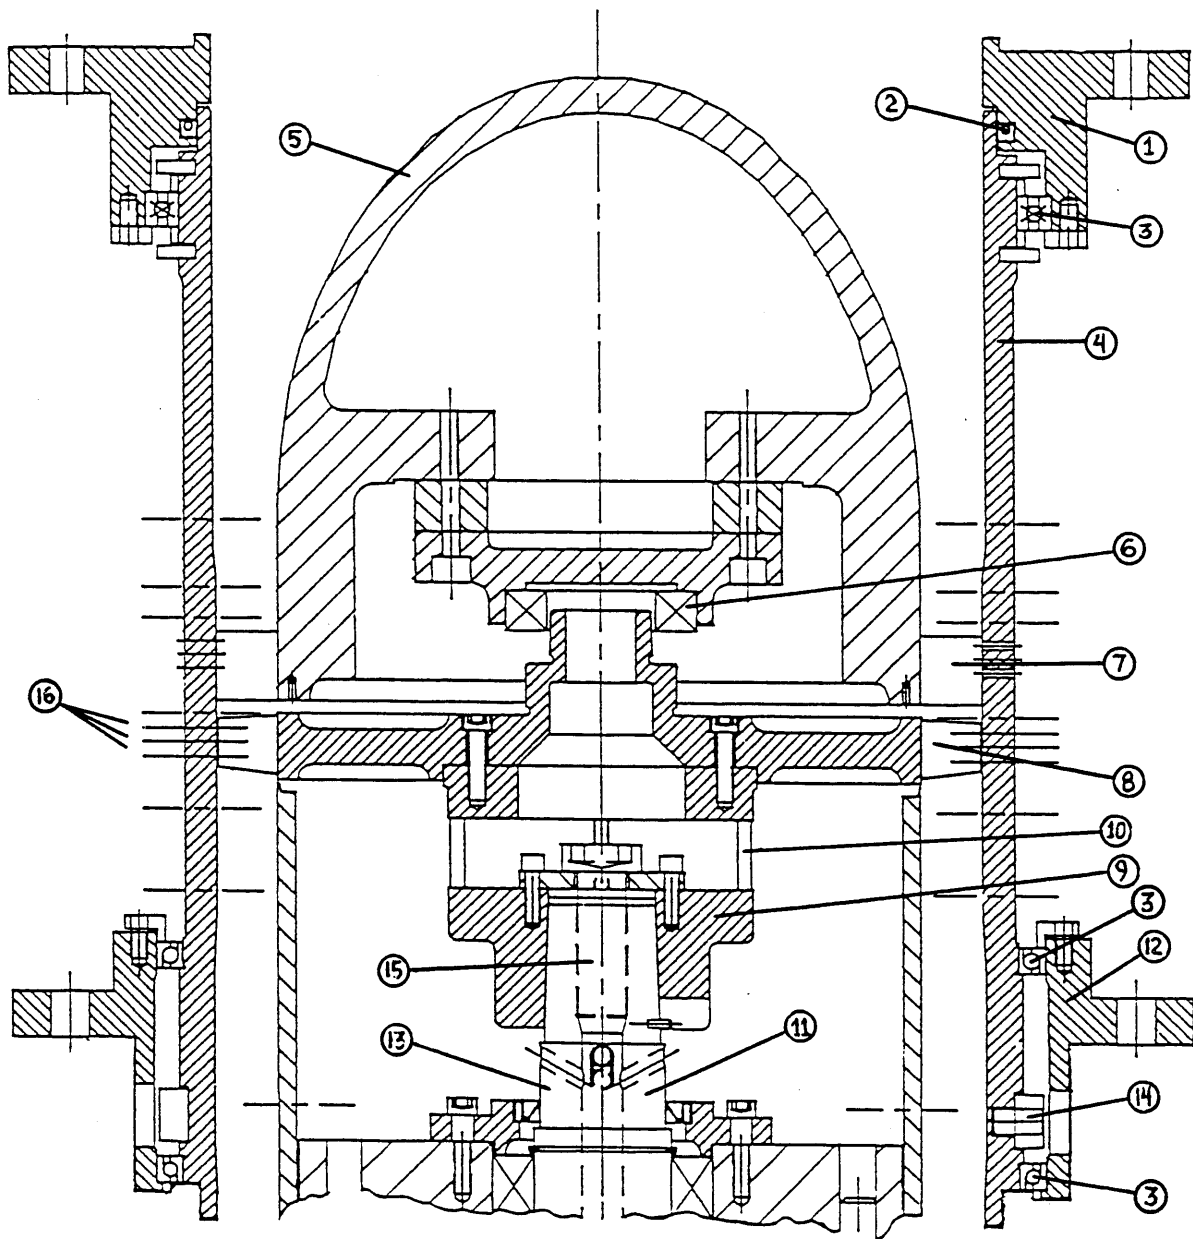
Turbine test section, upper section. (1) Upper flange, (2) Rotatable casing seal, (3) Rotatable casing bearing, (4) Rotatable casing, (5) Ogive, (6) Electrically insulated snubber bearing, (7) Stator blades, (8) Rotor, (9) Rotating dynamometer, (10) Square posts where strain gauges are attached, (11) Upper drive shaft, (12) Lower flange, (13) Location of upper torque strain gauge bridge, (14) Chain for rotating casing, (15) Hollow shaft for instrumentation wires, (16) Three axial locations for stator retaining screws
